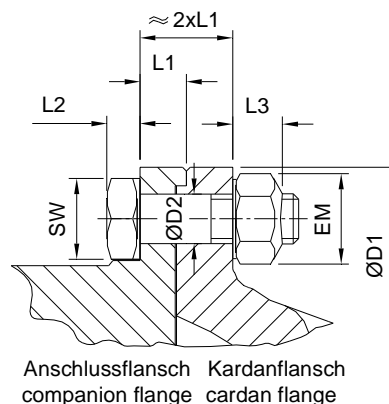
Bolting SAE Flanges - Connecting flange / Cardan flange
